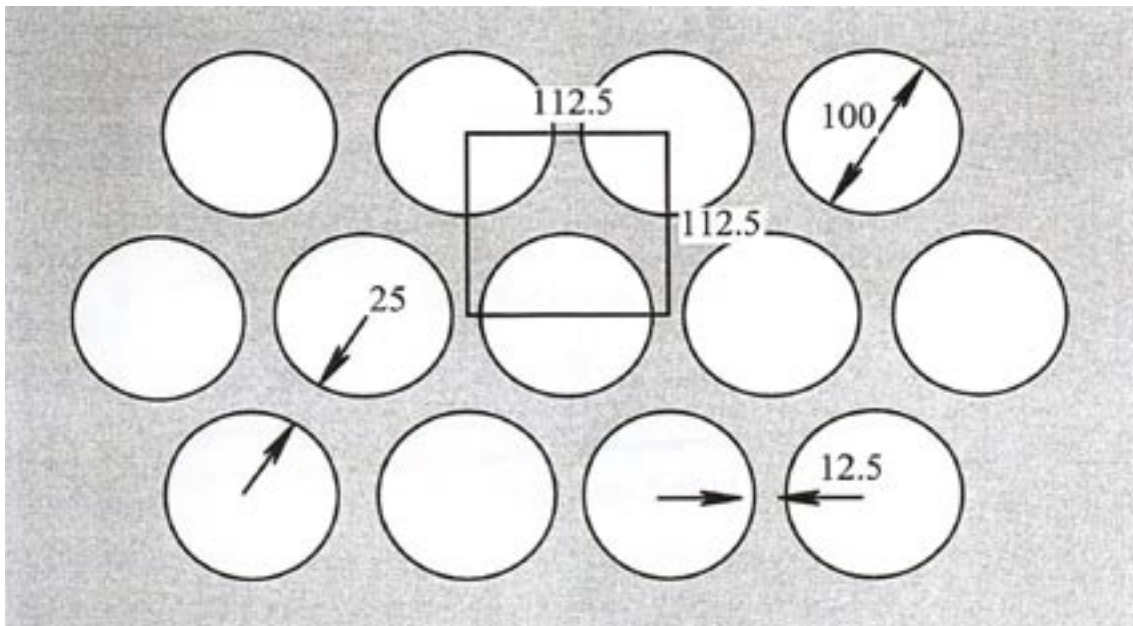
Section of supercontainer shell surface showing dimensions [mm] of the perforations.
